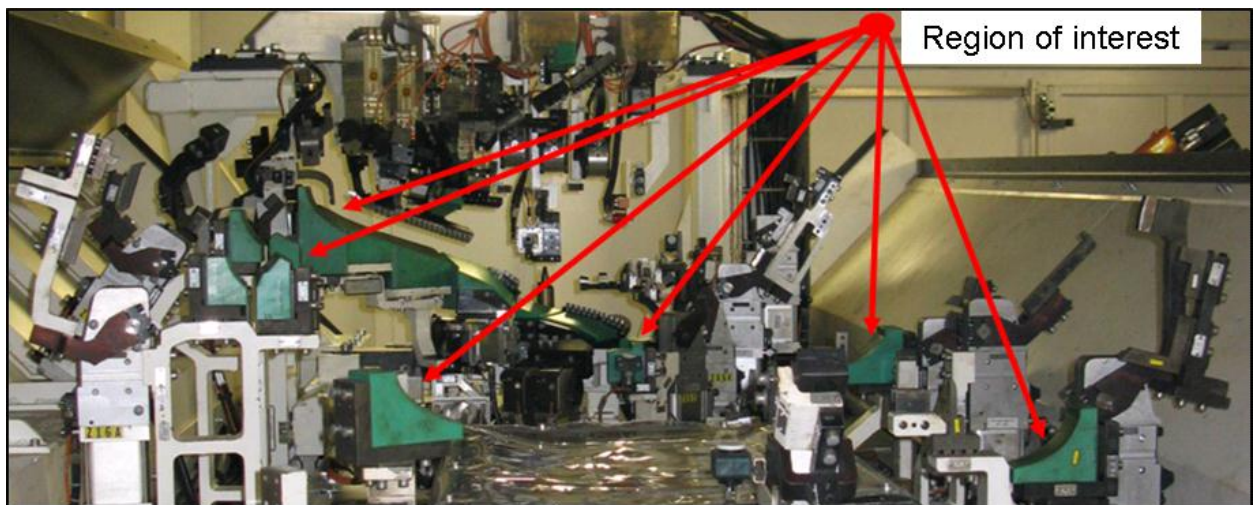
Geometrical welding drums "Wilder Mix "
